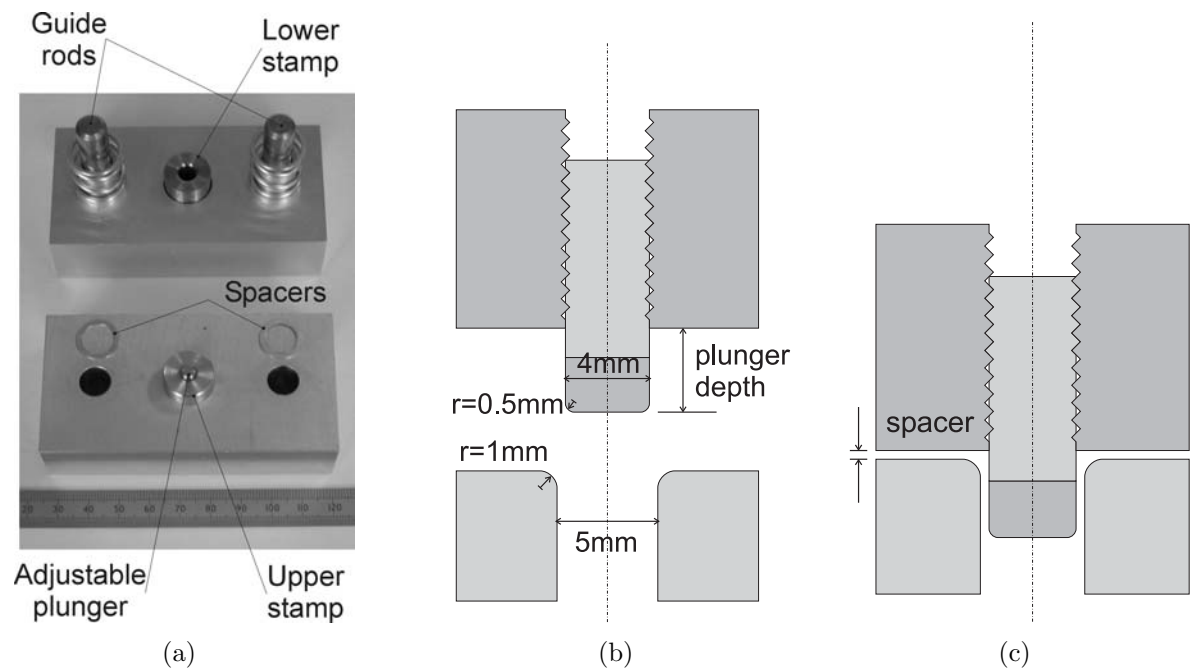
(a) Equipment used for compression-forming domes from Hytrel sheet, and (b) the compression-forming stamps before forming and (c) during forming, with an adjustable threaded plunger and adjustable spacers.
